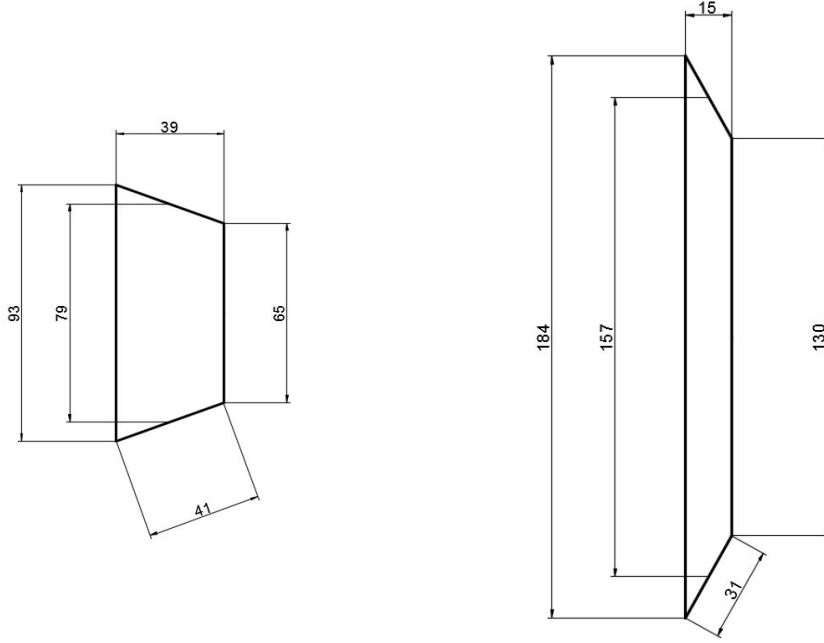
Pinion and Crown Wheel Dimensions.
